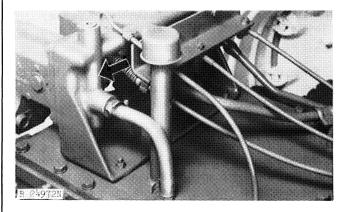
Rockshaft Control Valve - Tractors without Rockshaft
